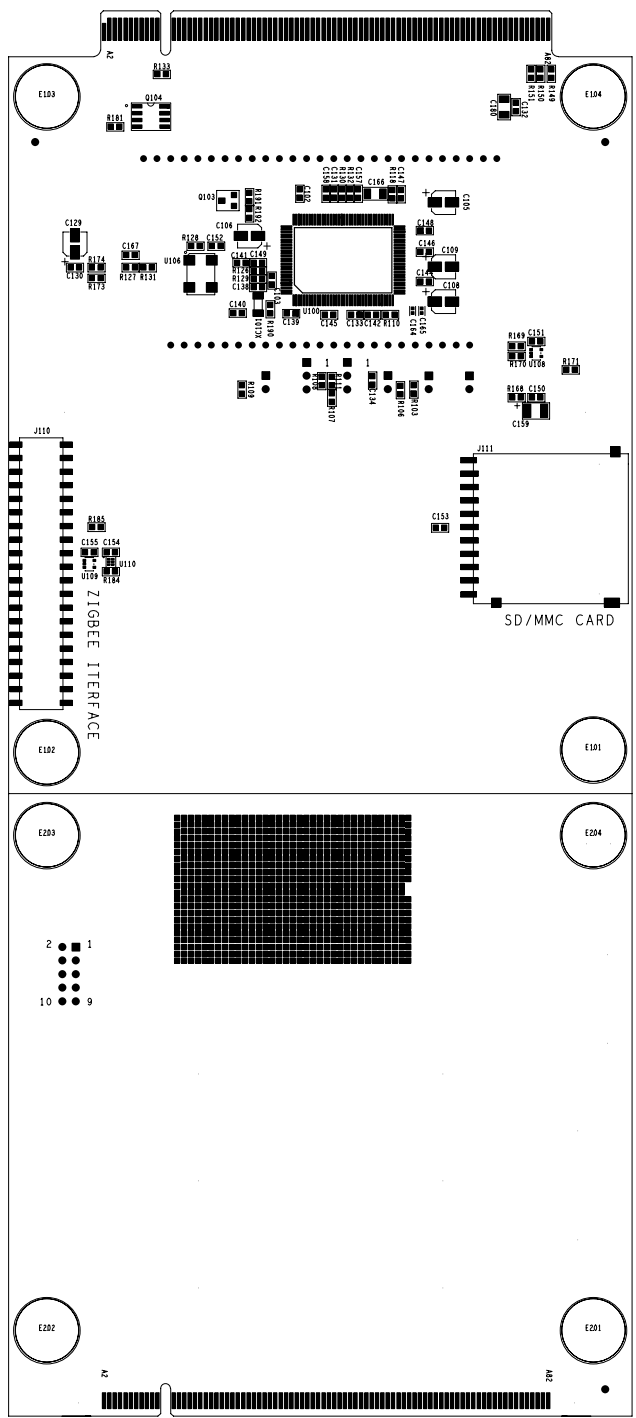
AT91SAM7L-EK Layout - Bottom View
